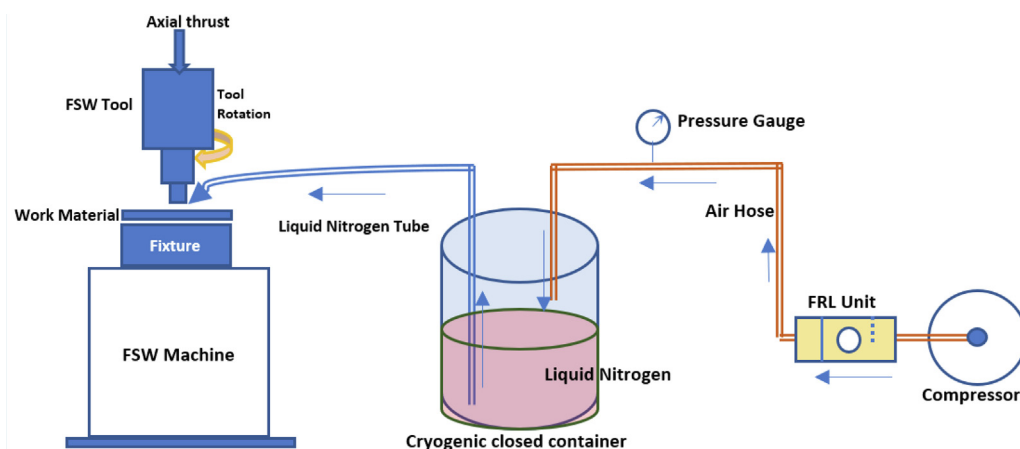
Schematic arrangements of Cryogenic Friction Stir Welding Process.
